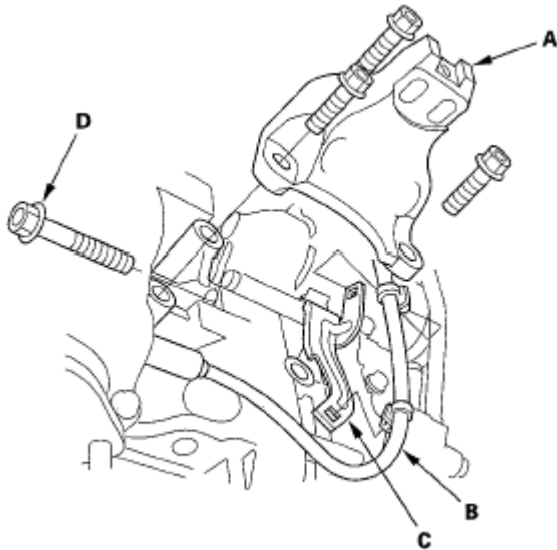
Identifying Front Mount Bracket, Sensor Harness And Harness Clamp
